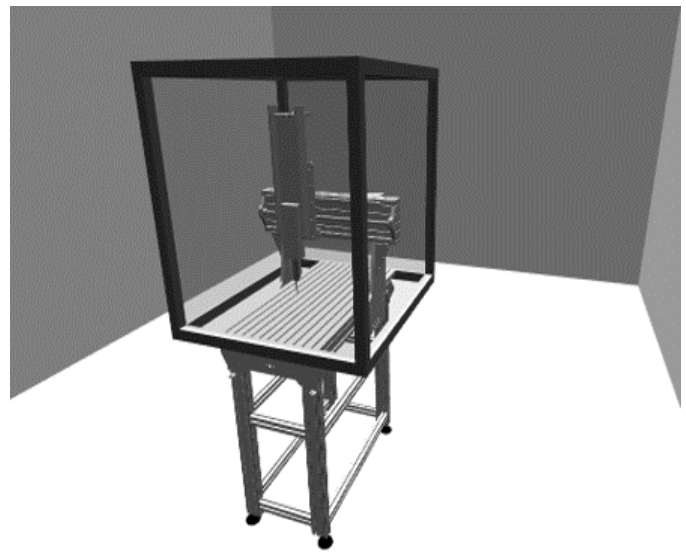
Implemented virtual twin of 3-Axis CNC Milling machine.
